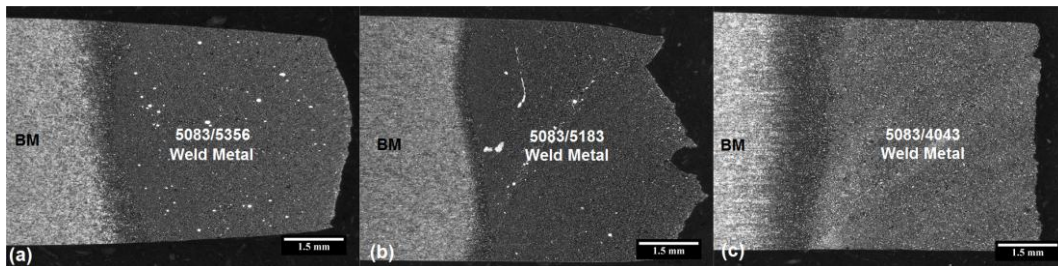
Tensile fractures of dressed welds in 5083 aluminium welded with (a) ER5356 filler wire; (b) ER5183 filler wire; and (c) ER4043 filler wire.
